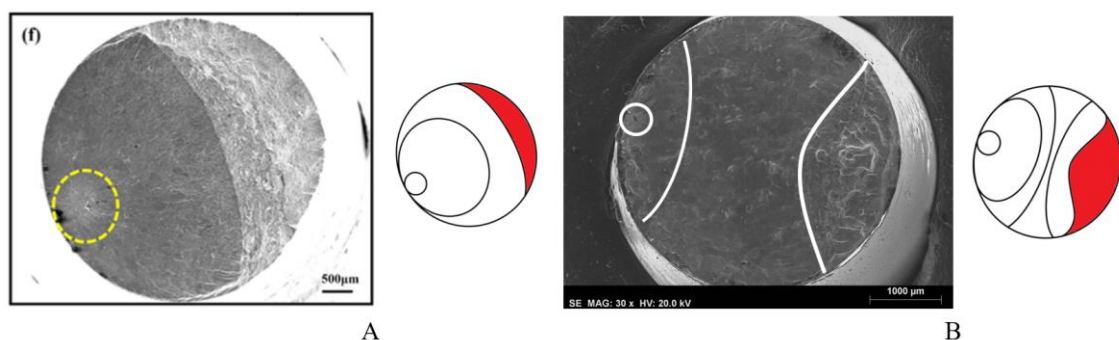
Fracture surface shape comparison: (A) ordinary VHCF fatigue fracture shape by Qian et al. [212]; (B) obtained fracture surface shape.
